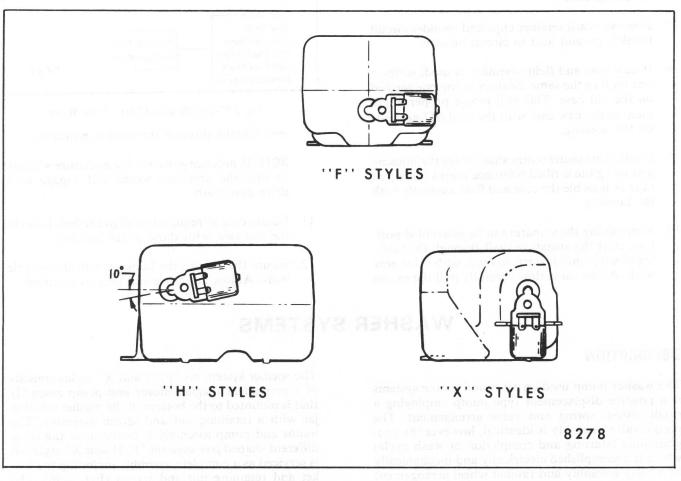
Motor and Pump Assembly Positioning to Jar
